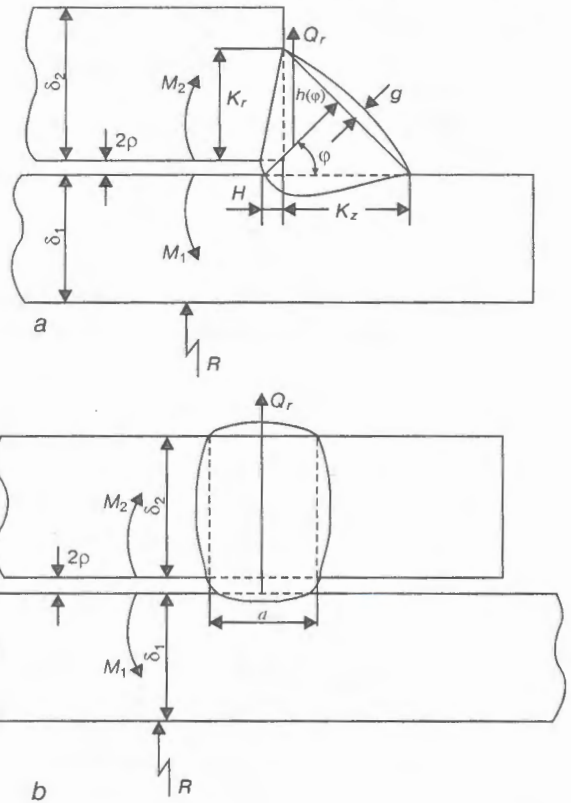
Schematics of loading of the joints: *a* – joints with fillet welds; *b* – lap-butt joints
